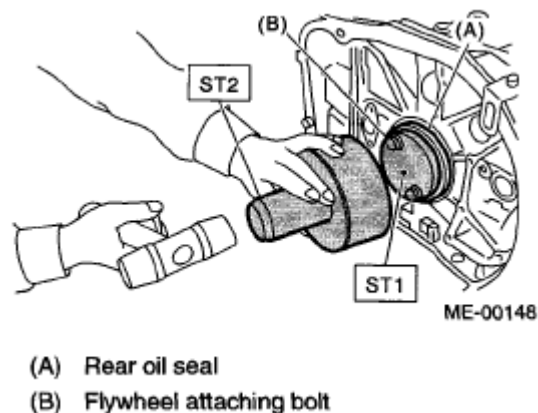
Installing Rear Oil Seal Using ST1 And ST2
